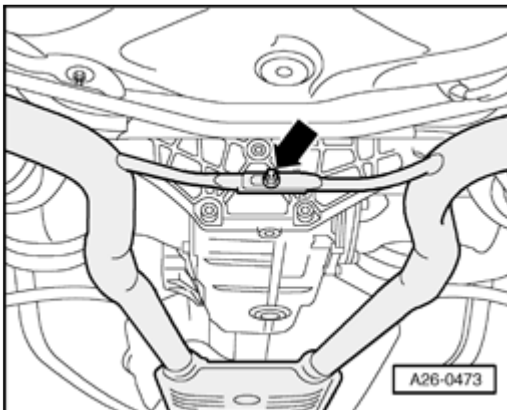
Loosening Nut Of Brace Between Exhaust Pipes
